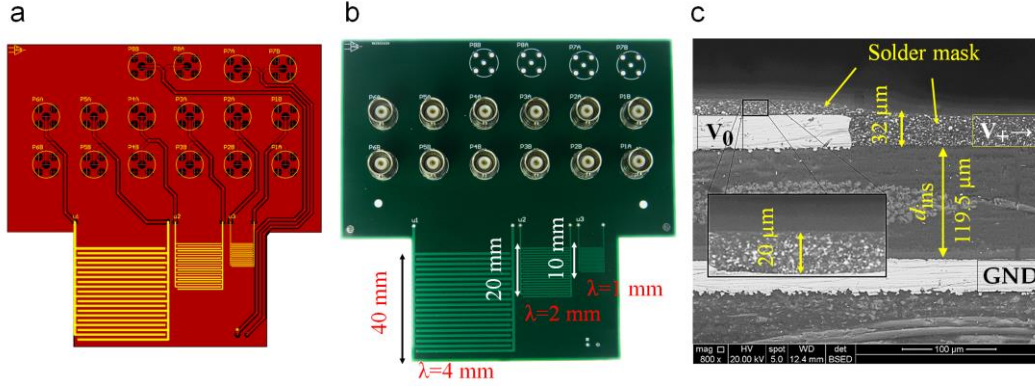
(a) The IDS2.0 board as PCB drawing prior manufacturing showing the shielded sensing leads (red) and the IDS electrodes (yellow). (b) The manufactured IDS board showing dimensions of the three IDS electrodes. (c) A SEM cross section view showing spatial dimensions of the relevant layers.
